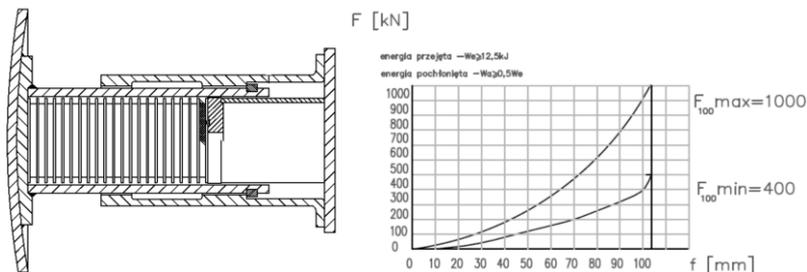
Cross-section and static characteristic of rubber railway buffer
